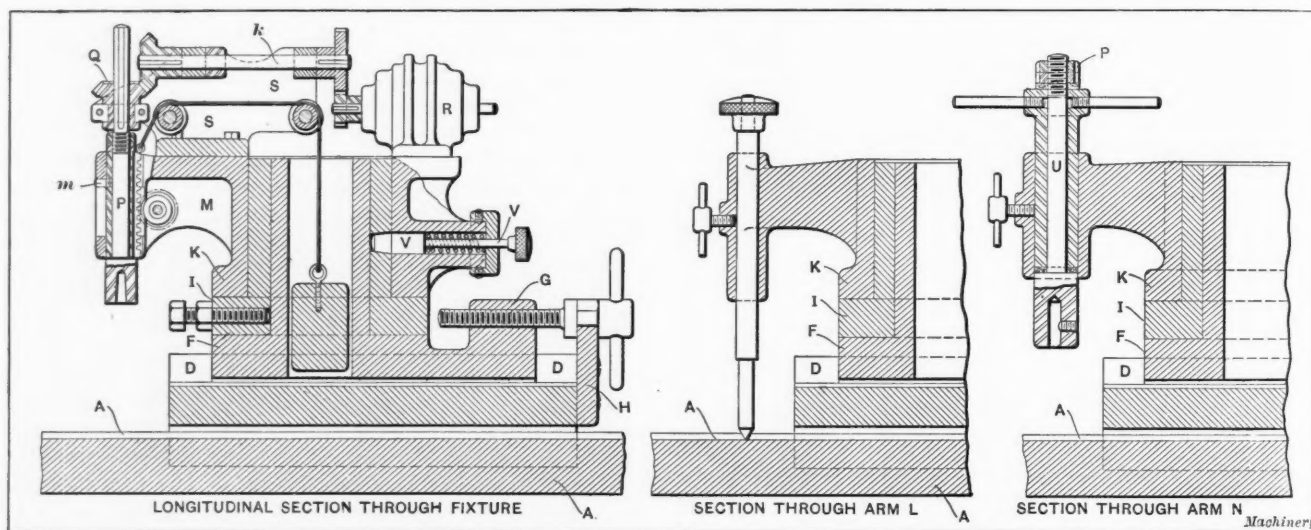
Longitudinal Cross-sectional View of Drilling and Tapping Fixture and Cross-sectional Views of Arms L and N
